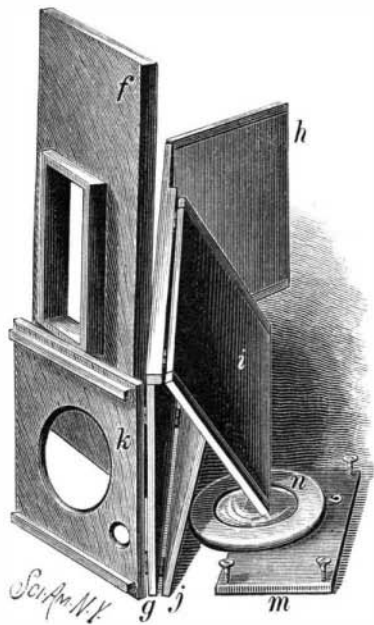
FOLDING BOX PARTLY CLOSED.
